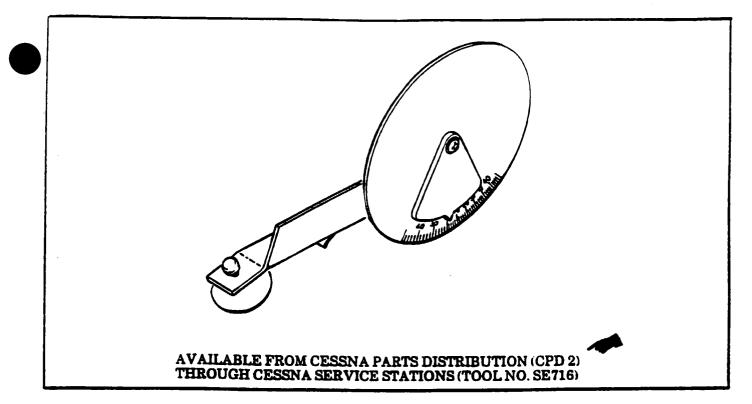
Inclinometer for Measuring Control Surface Travel
